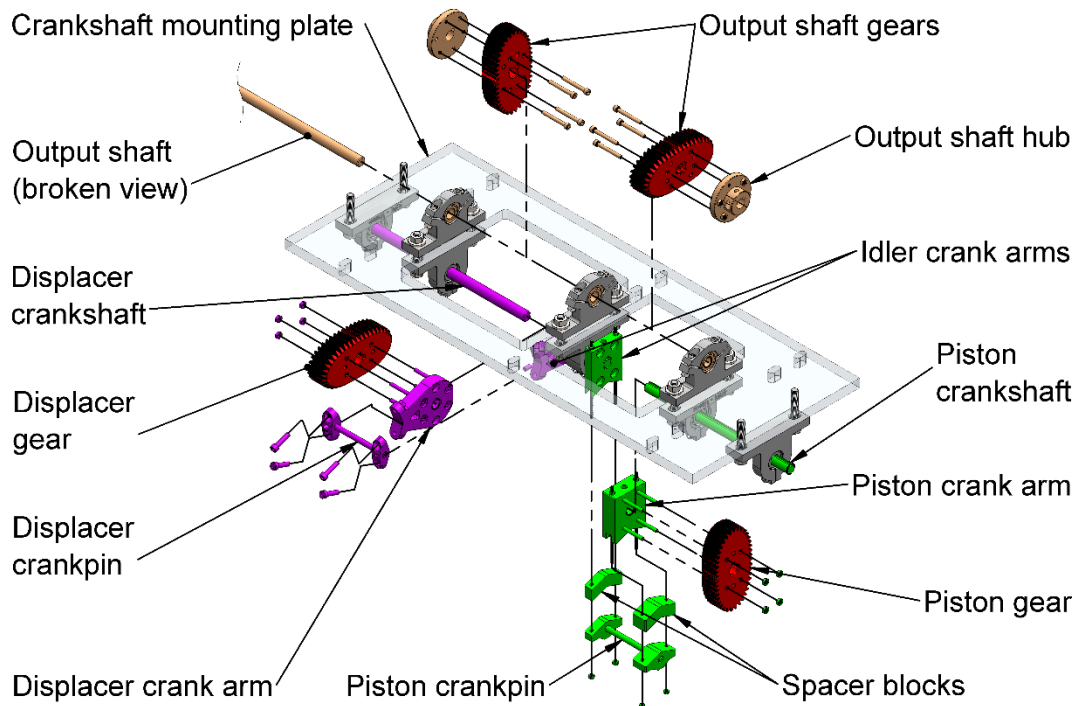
Explode view of the engine crankshaft mounting plate used for swapping out the crank shaft gear sets.(mounting plate shown transparent for clarity)
